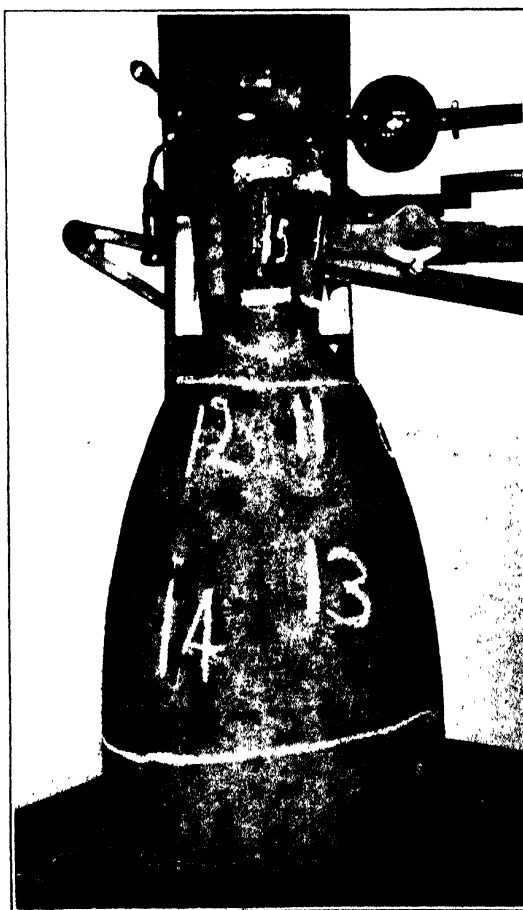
400-LB. AIR BOMB CASTING TO BE RADIOGRAPHED
